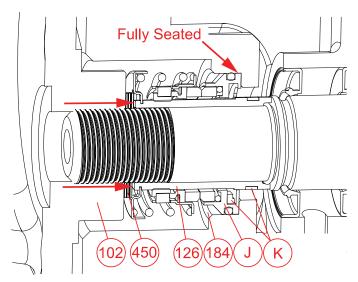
Mechanical Seal on sleeved Shaft (unsheared)
